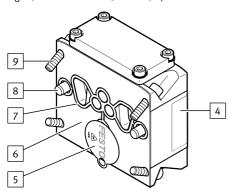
VOGI-F100FS-T32H-M-F90, view B
